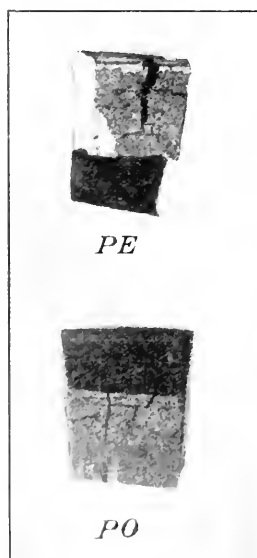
END VIEWS OF SPECIMENS PO AND PE, SHOWING CRACKS EXTENDED DEEPLY INTO METAL; MAGNIFICATION 1.5
